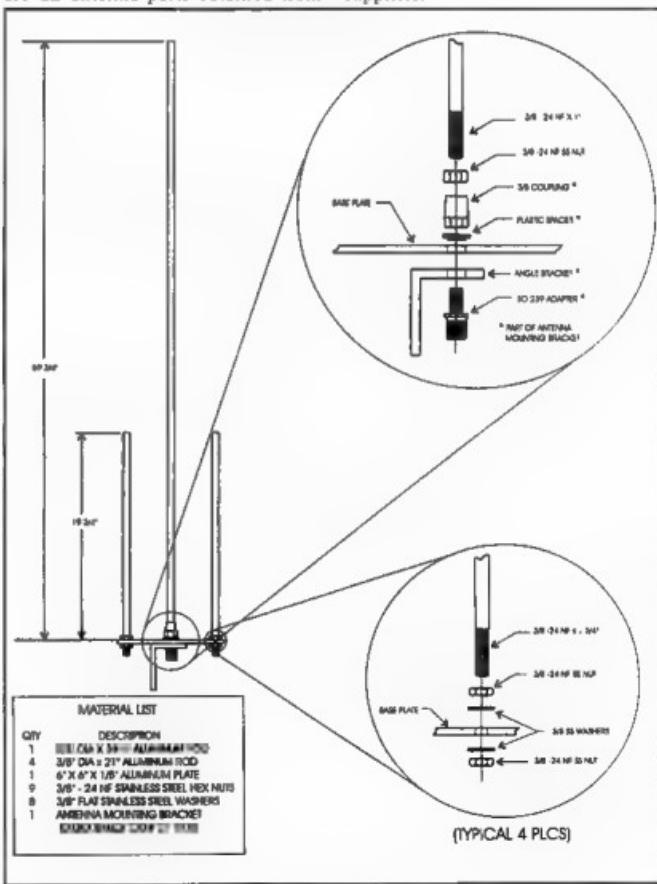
Assembly Drawing of Skeleton Sleeve Fed Monopole
